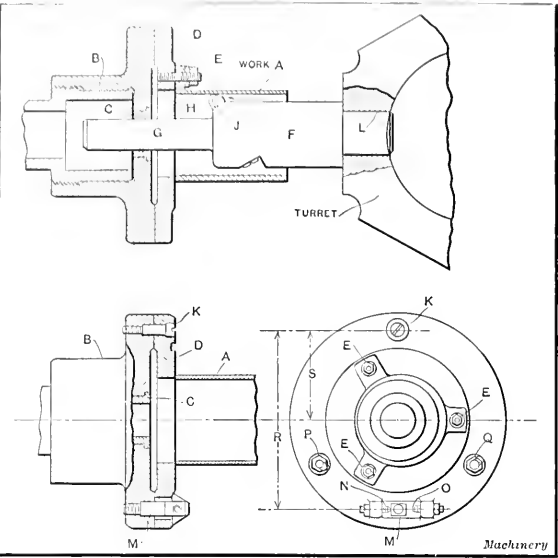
Swinging Fixture for Eccentric Piston Ring
